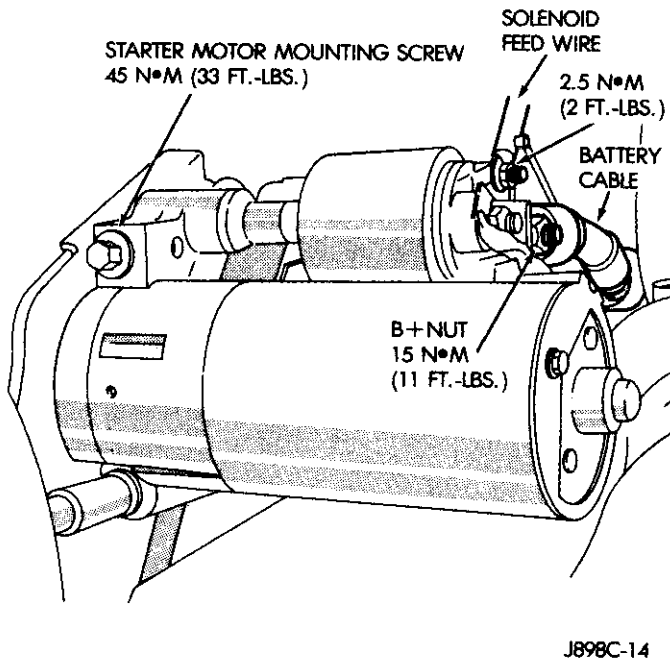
Starter Motor Removal/Installation - 2.5L XJ and MJ
